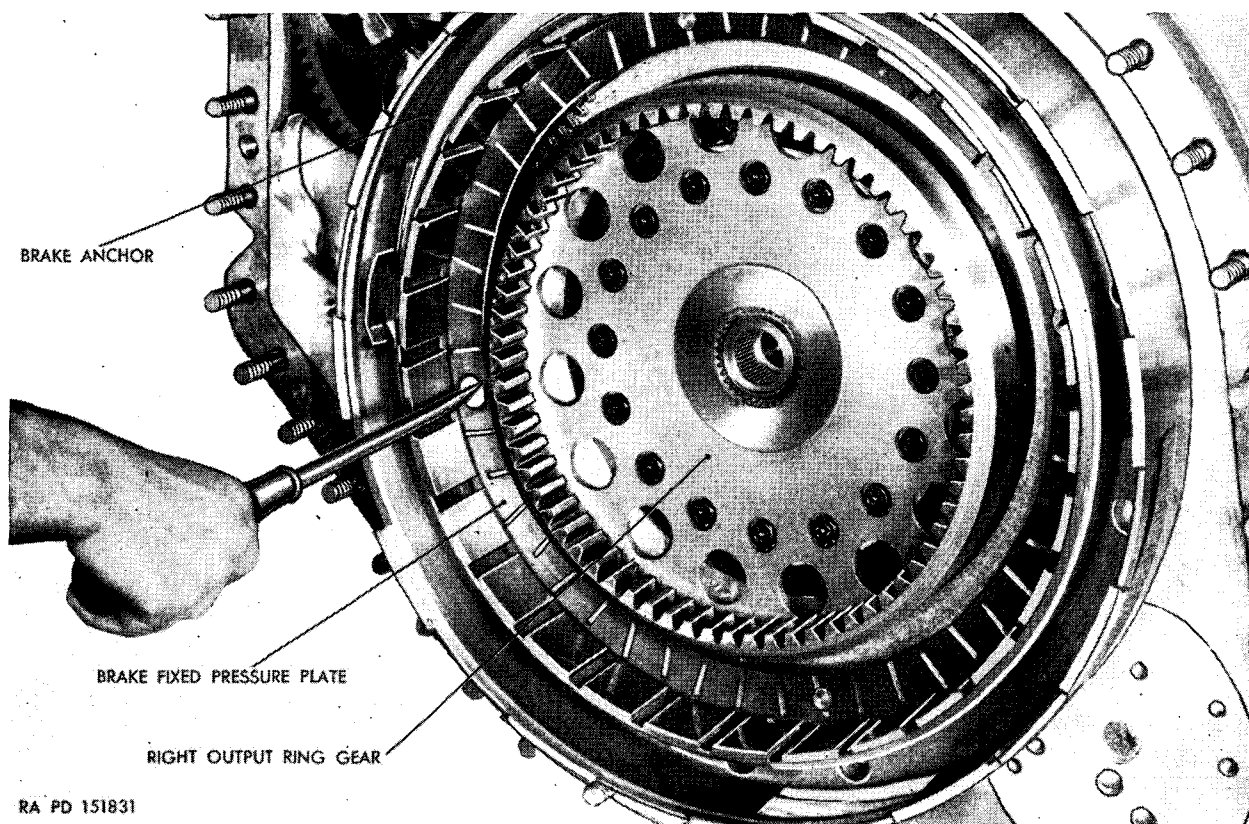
Removing or installing brake-fixed-pressure-plate screws.
